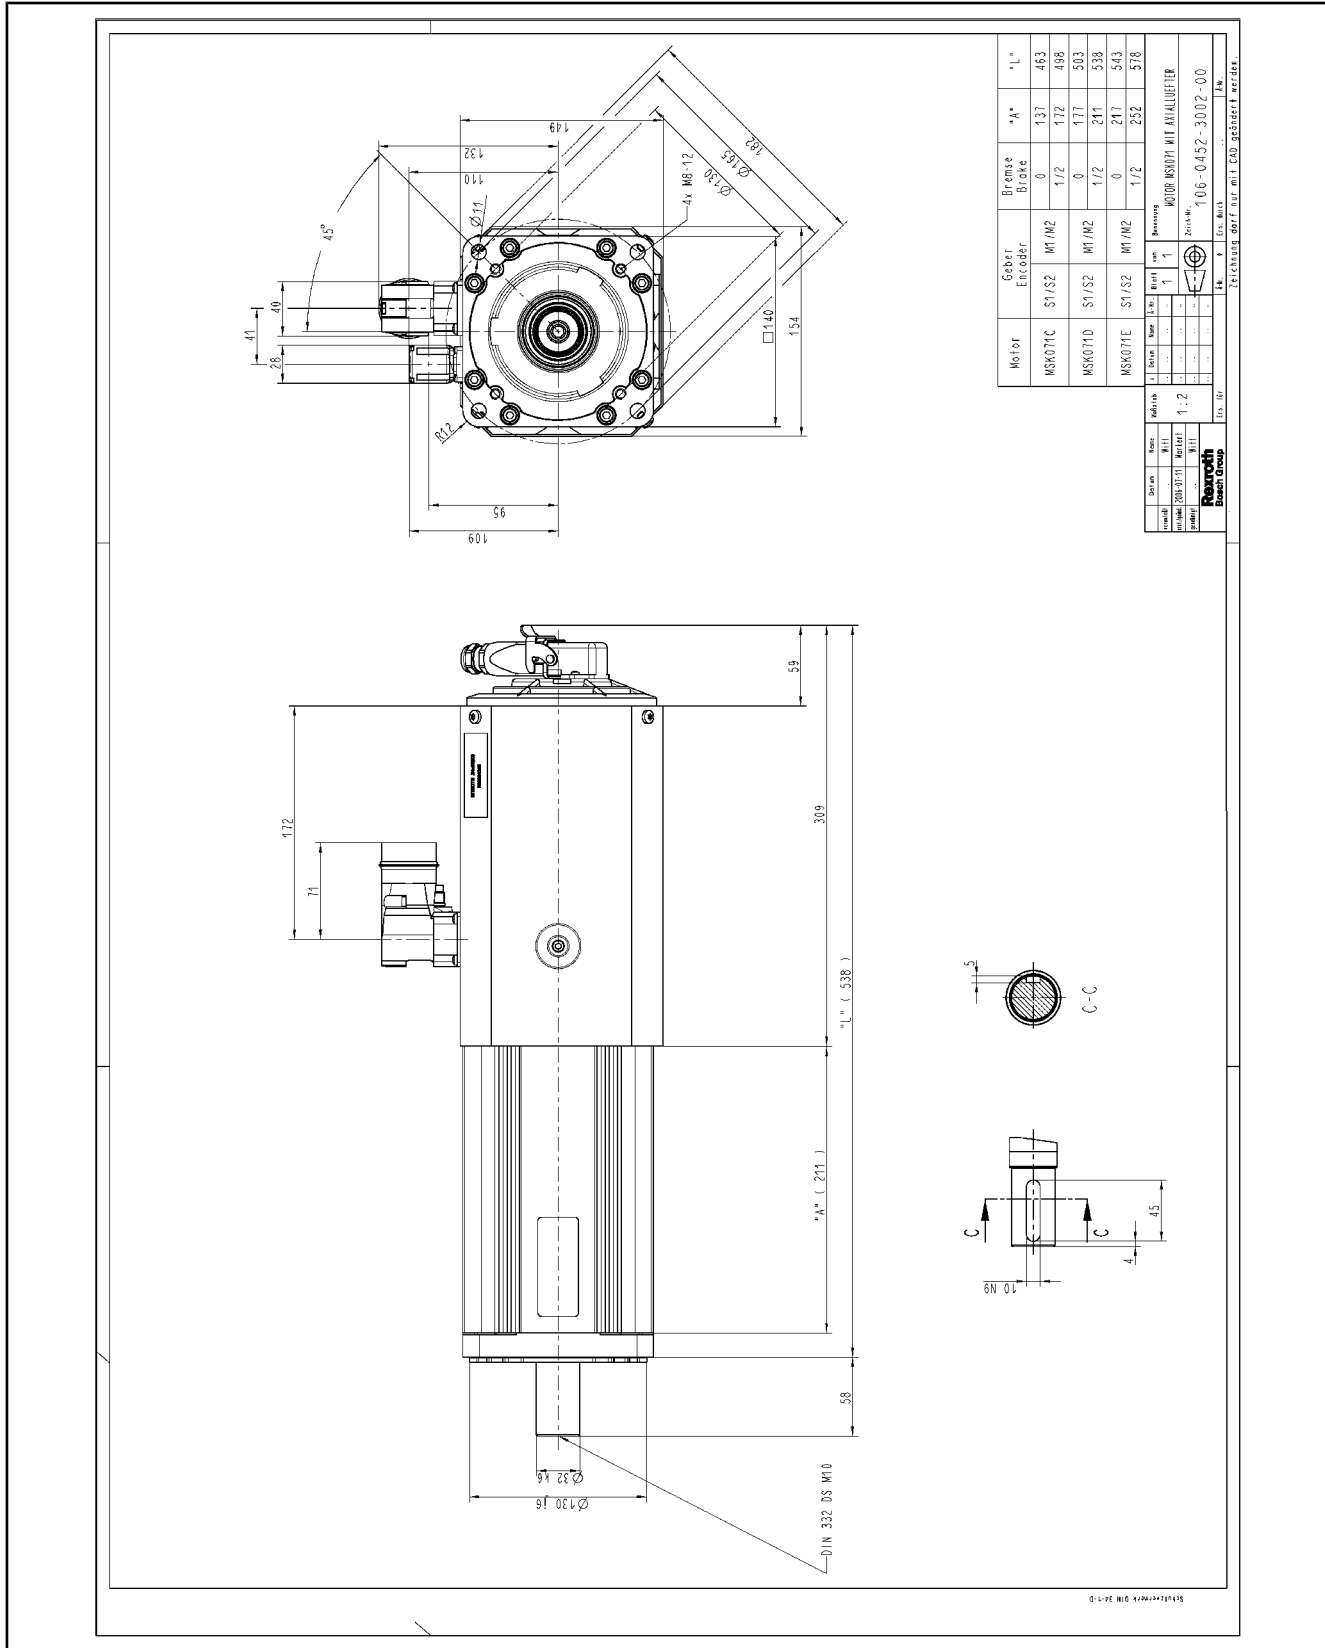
Dimension sheet MSK071 with axial fan unit
